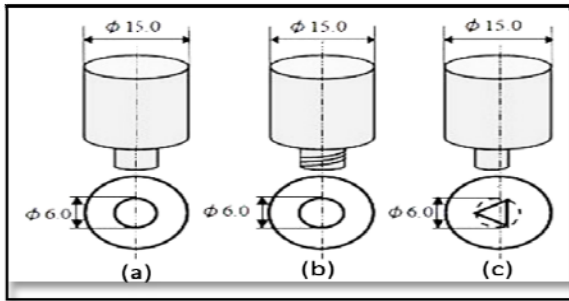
(a) without threads (b) with threads (c) Triangular prism tool
